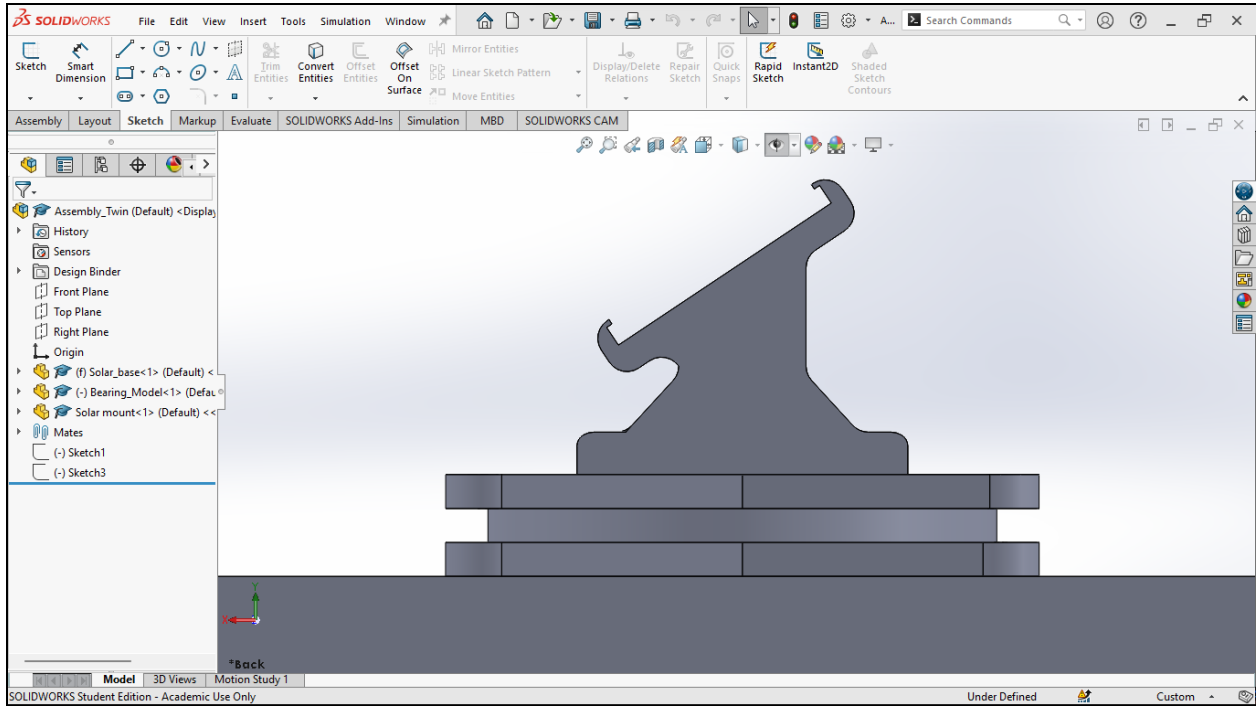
The solar mount sits on top of the top plate of the solar bearing. The bearing is separated into a top and bottom plate, by an intermediate bearing ring. Rotation is permitted by marbles on the inside.
